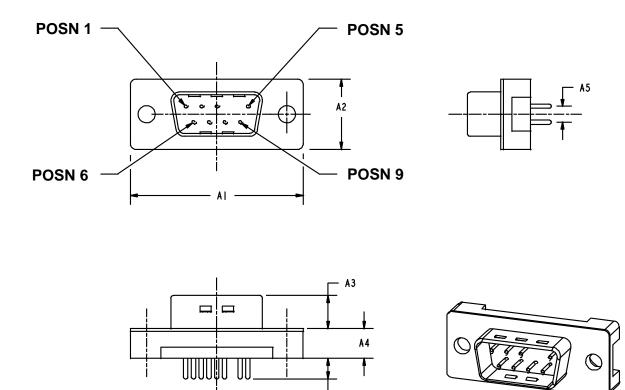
Free board straight thru hole (version 1) overview and outline dimensions
